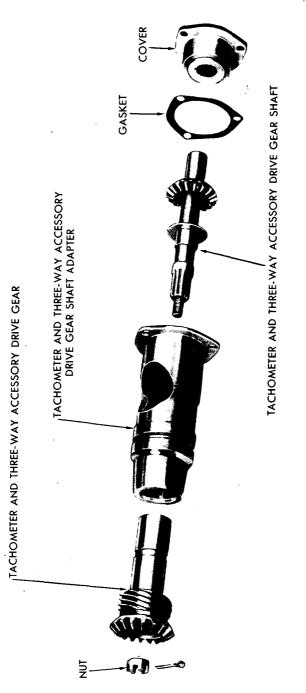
Three-way Accessory Drive Adapter Disassembled
